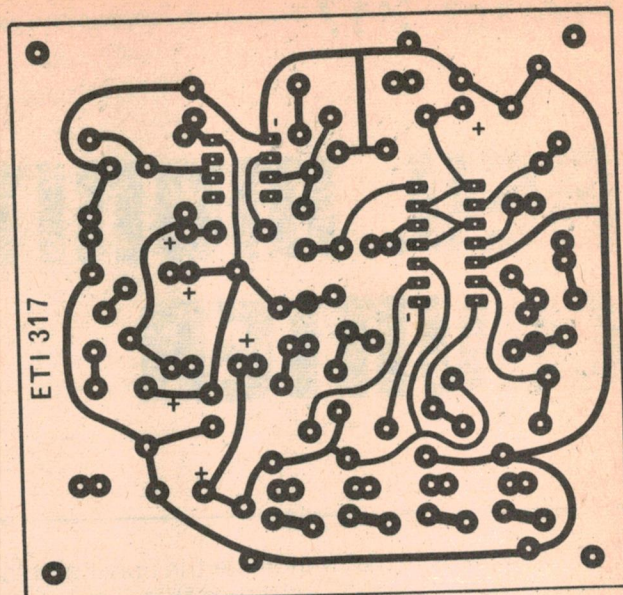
Printed circuit layout. Full size 80 x 75 mm.
